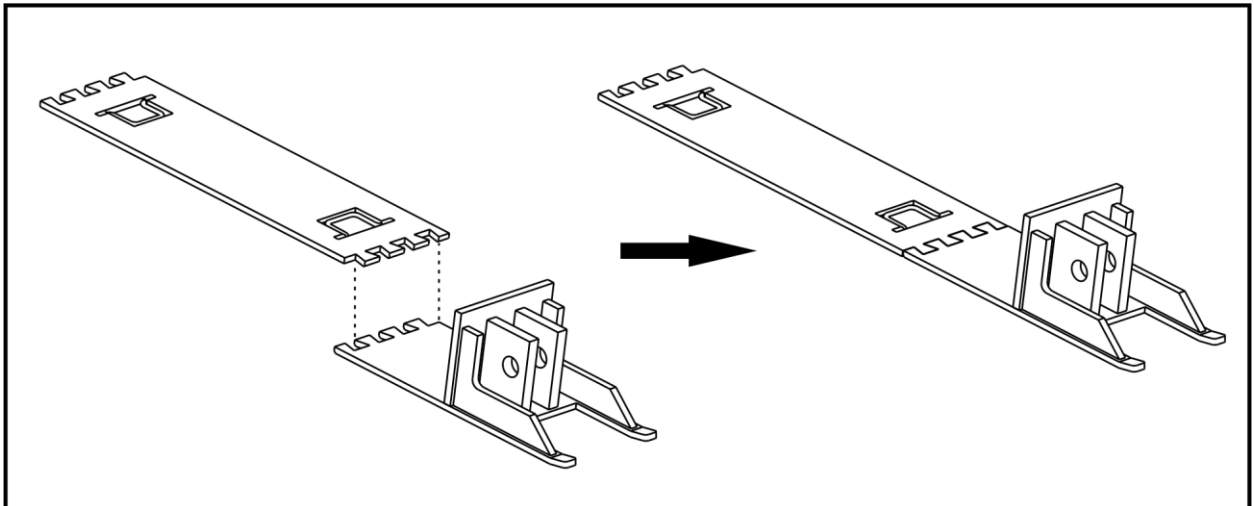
Connecting XLP150 Push-Pull Head to Slider Plate
